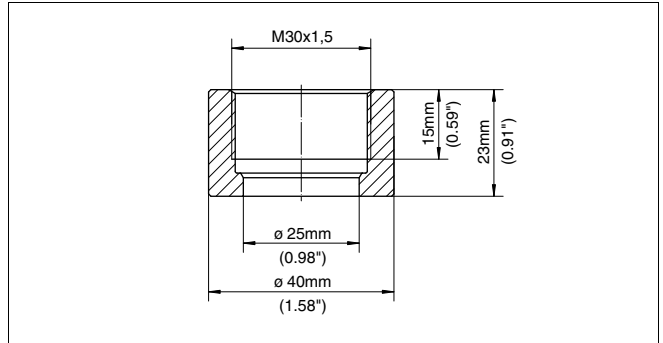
Dimensions welded socket M30 x 1.5
